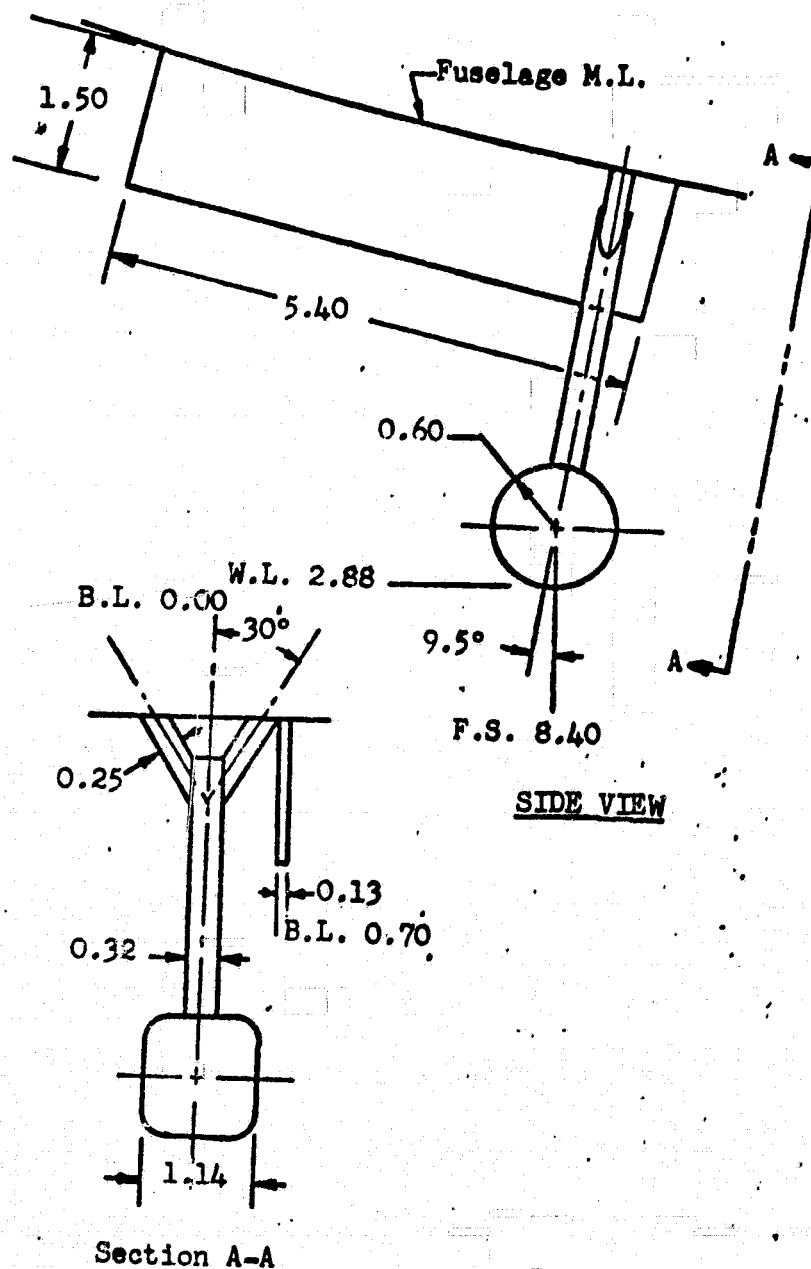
DRAWING OF MAIN LANDING GEAR G2
